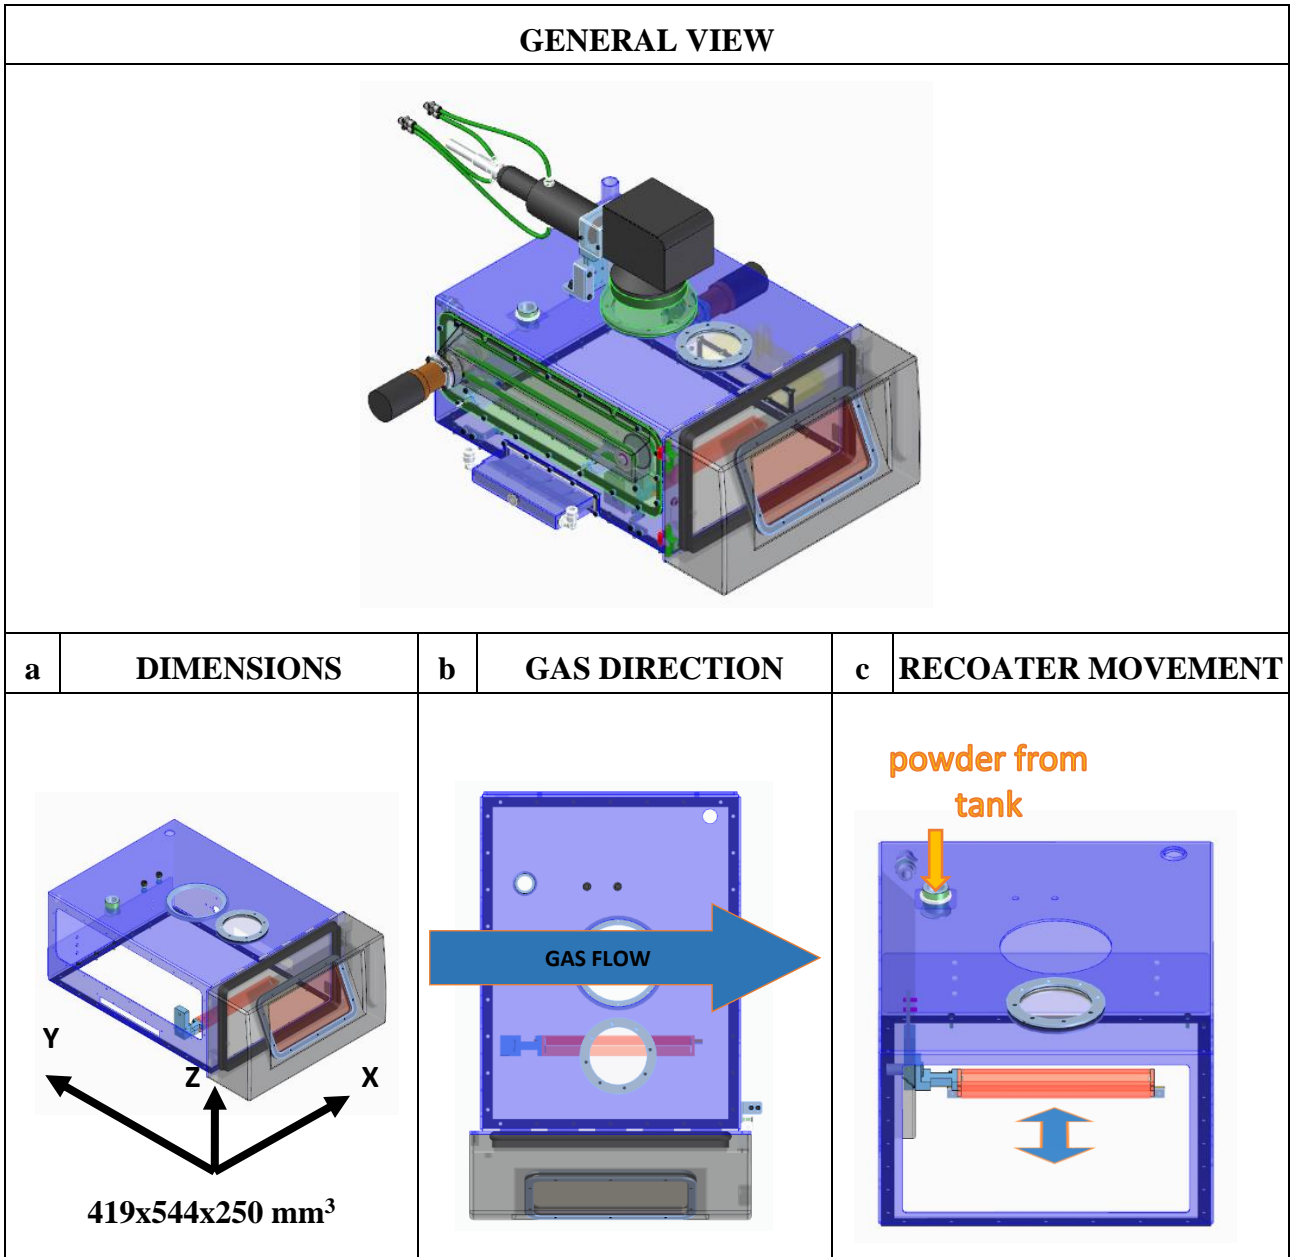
general view of the build chamber and view of a) dimensions, b) the gas flow and c) the recoater movement with the refill powder direction
